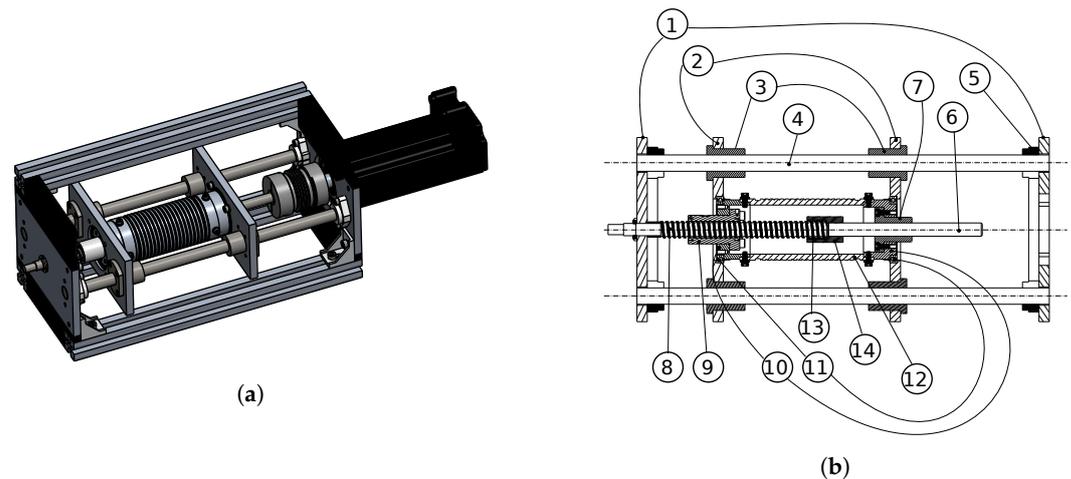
CAD model of the Spline Winch. (a) Axonometric view (part of the frame is removed for display reasons). (b) Cross-section of the winch (motor and motor coupling are removed for display reasons).
